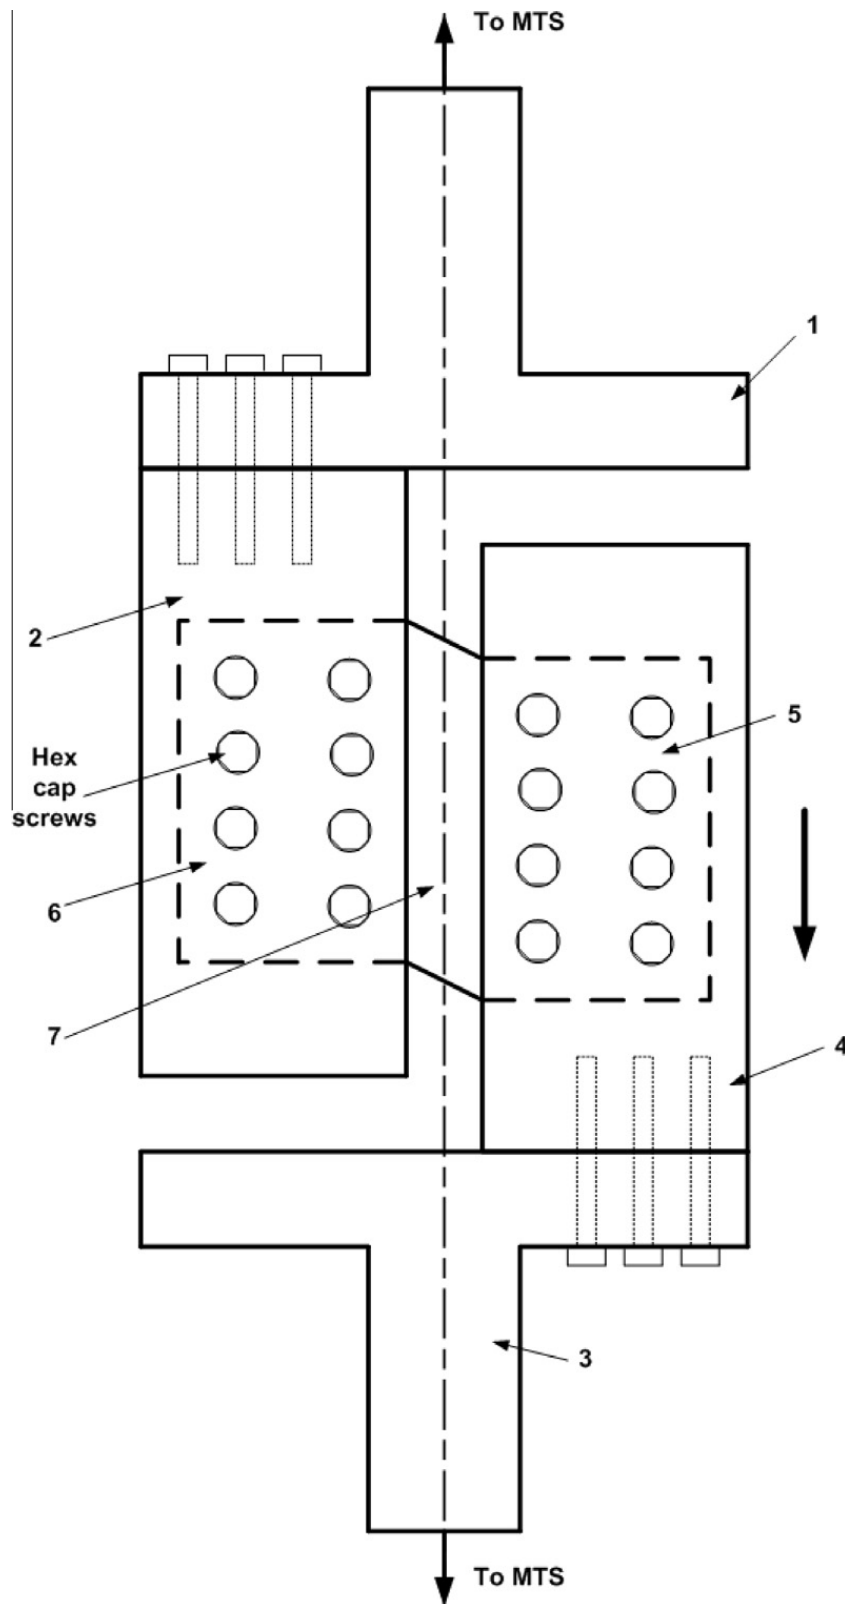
Schematic section view of the simple shear fixture (1) upper fixture, (2) upper middle fixture, (3) bottom fixture, (4) bottom middle fixture, (5) movable grip section of shear specimen, (6) fixed grip section of shear specimen, and (7) gage section of shear specimen.
